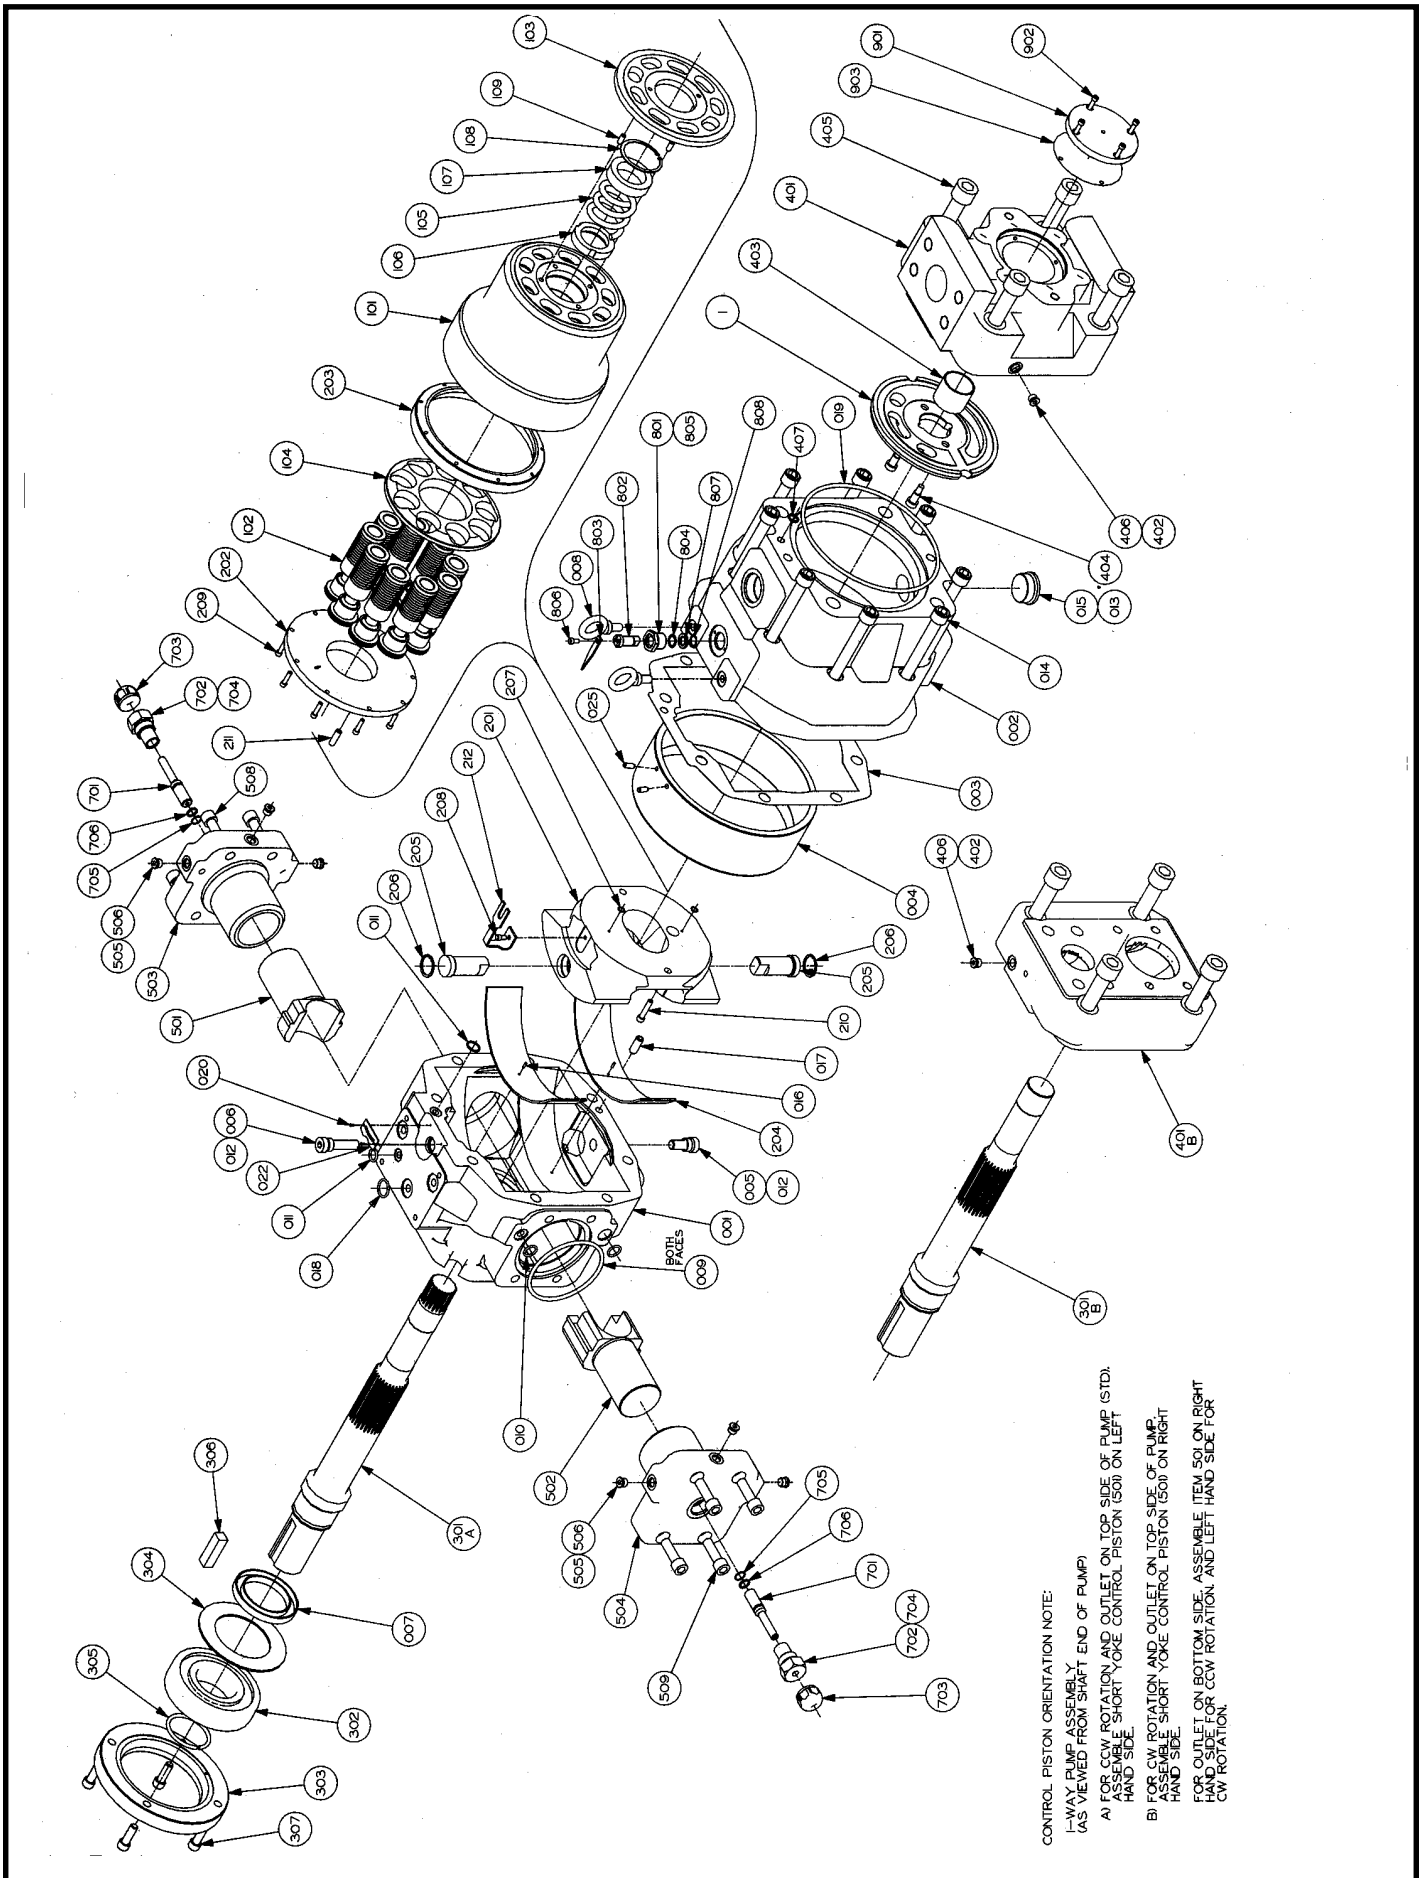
Exploded Parts Drawing (51888 sht. 2).
